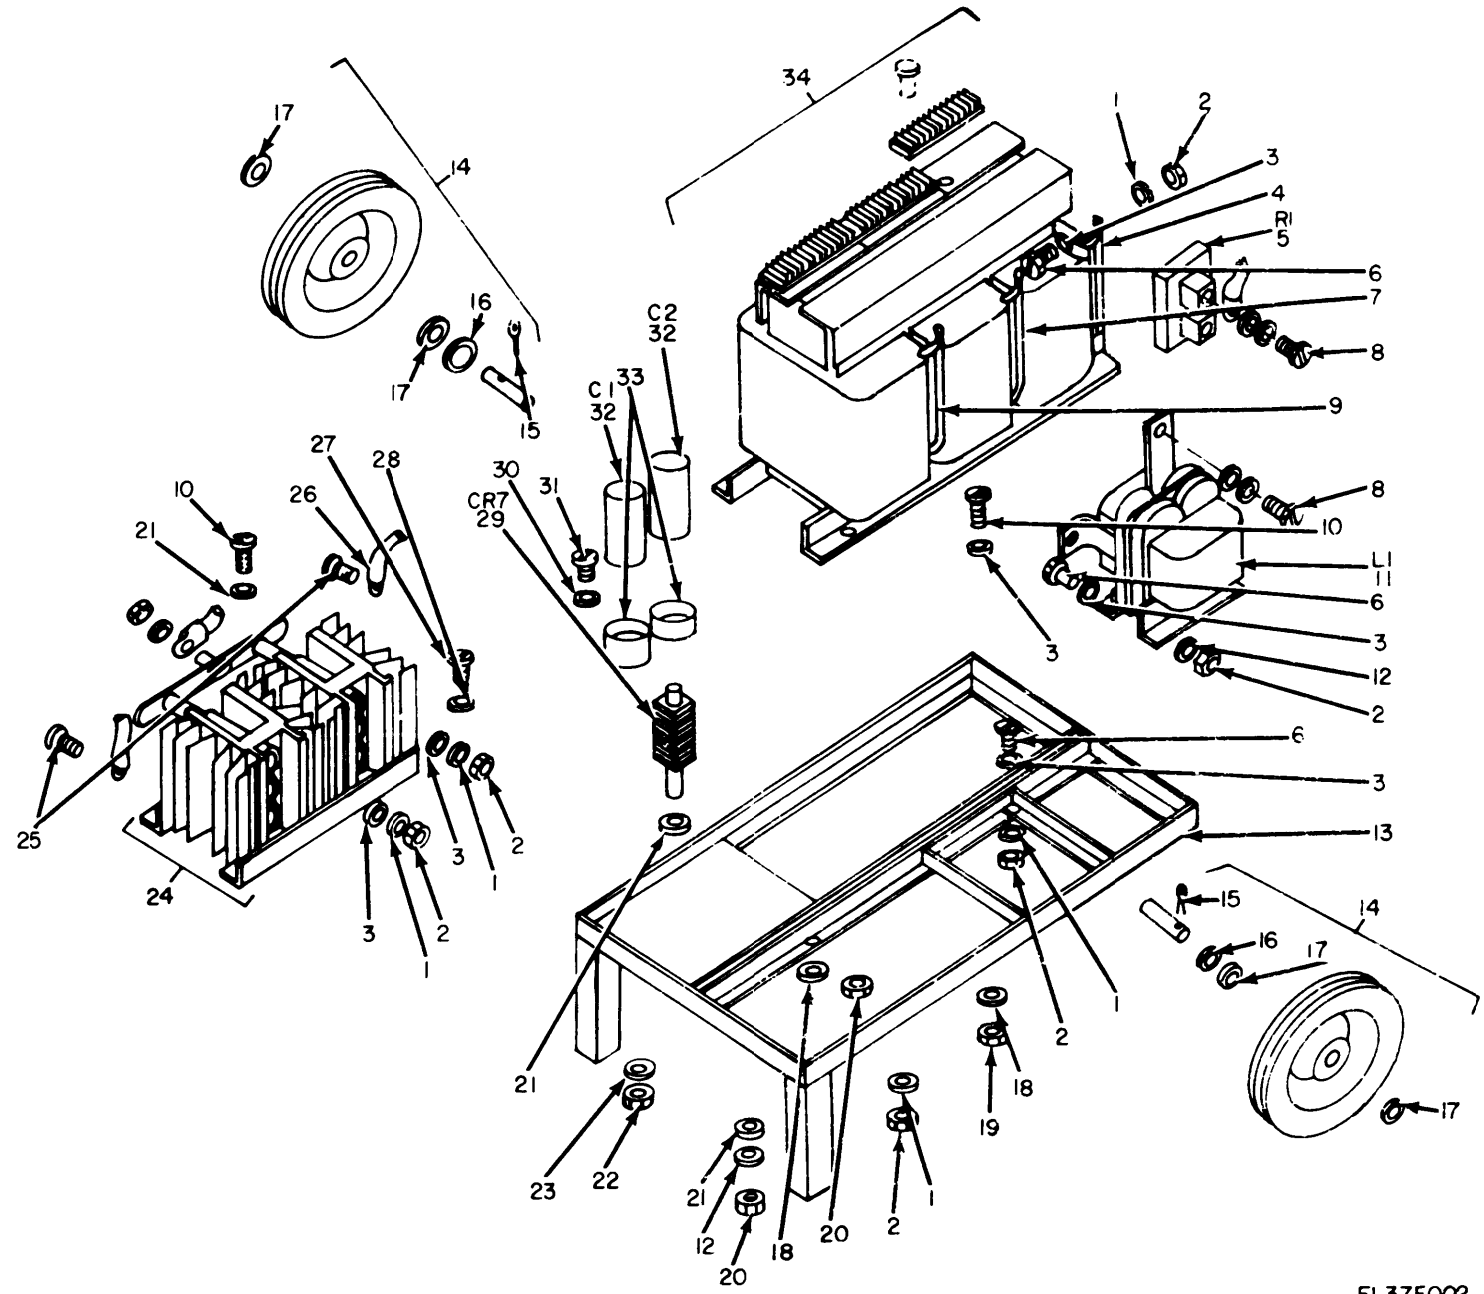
Power Supply PP-4606B/G, Base Assembly.
